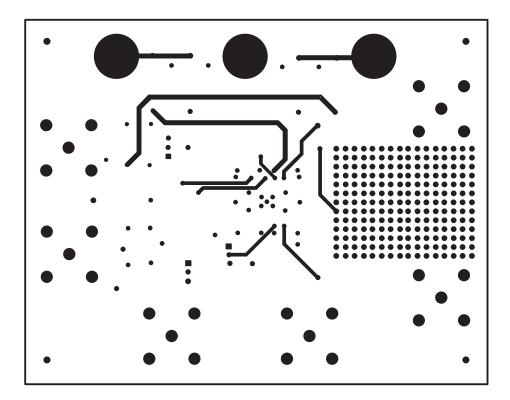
THS6002 EVM PC Board: Layer 3 — Signal Layout
